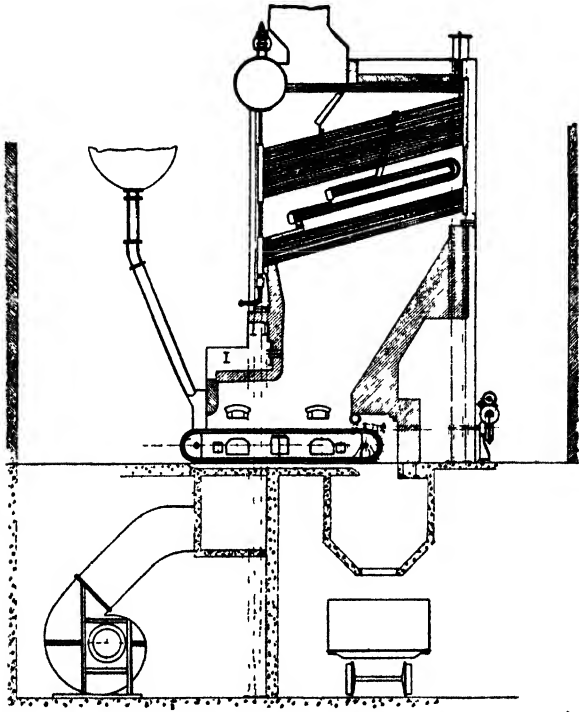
Coxe chain-grate stoker installed under a cross-drum boiler. Setting designed for burning midwest semi-bituminous coal. (*Combustion Engineering Corporation.*)
